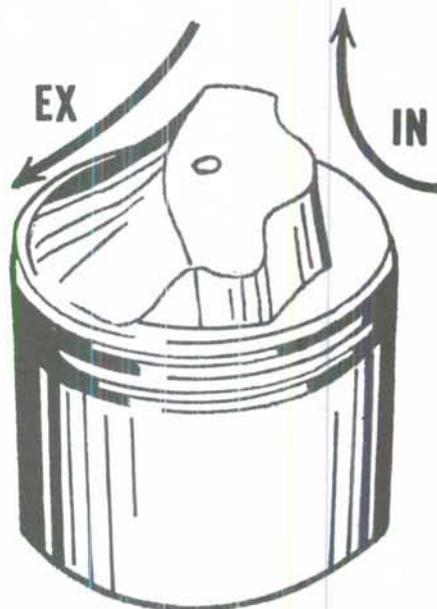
Baffle on top of piston head is designed to properly direct the flow of incoming mixture and exhaust discharge. Piston must be installed as shown, with relation to cylinder ports.
